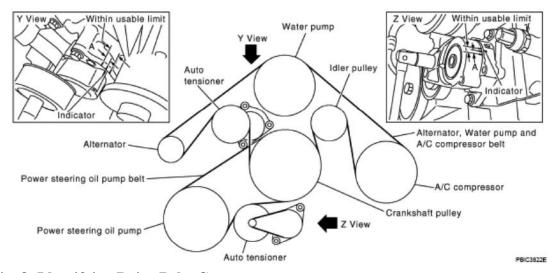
Identifying Drive Belts Component Courtesy of NISSAN MOTOR CO., U.S.A.
